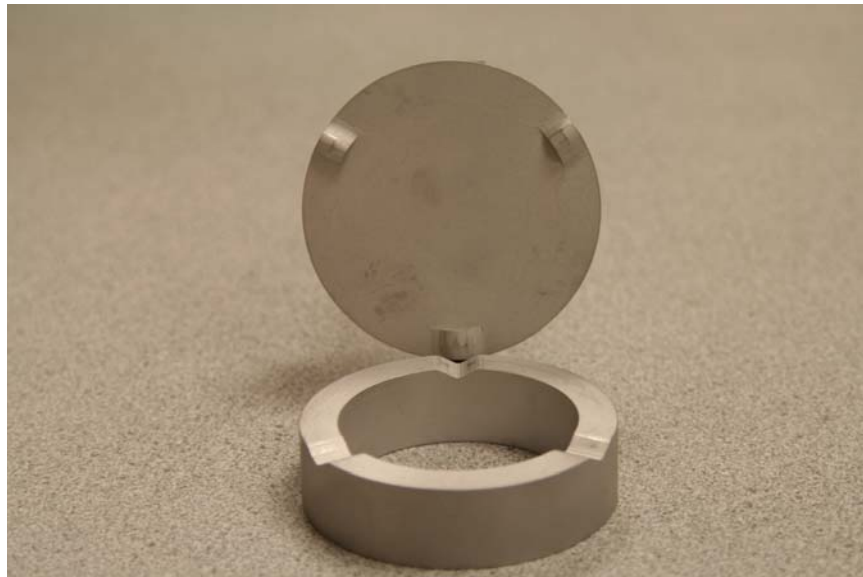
Demonstration assembly of the quasi-kinematic mounting features.
